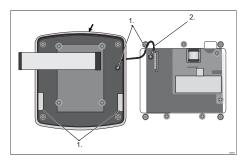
With control panel installation: Fit the profile seal onto the top part of the controller housing
